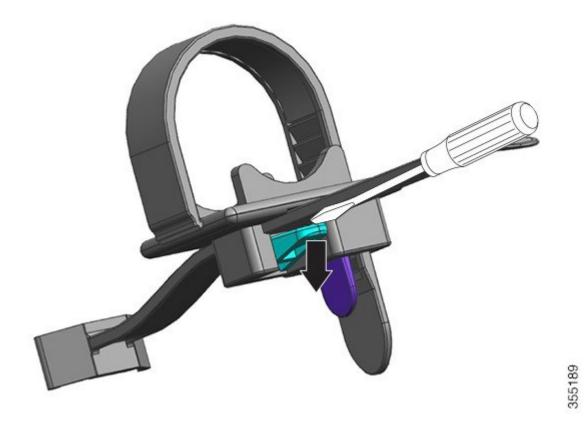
Clamp Latch - Detail, provides a clearer view of the clamp latch and the direction in which you have to push the latch to move it in direction 3b.
